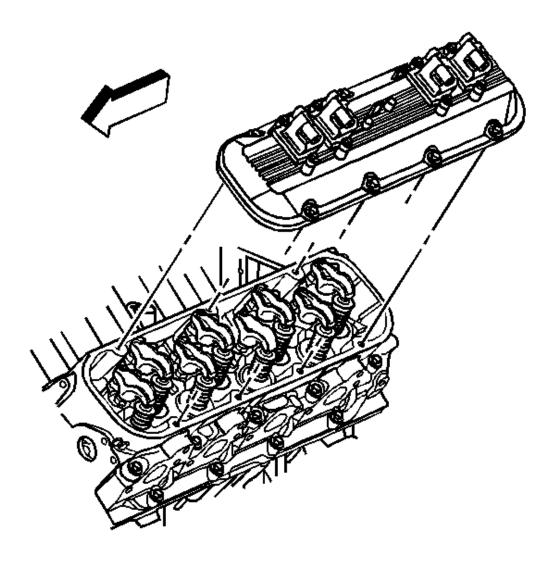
View Of Valve Rocker Arm Cover (Left) Courtesy of GENERAL MOTORS CORP.
